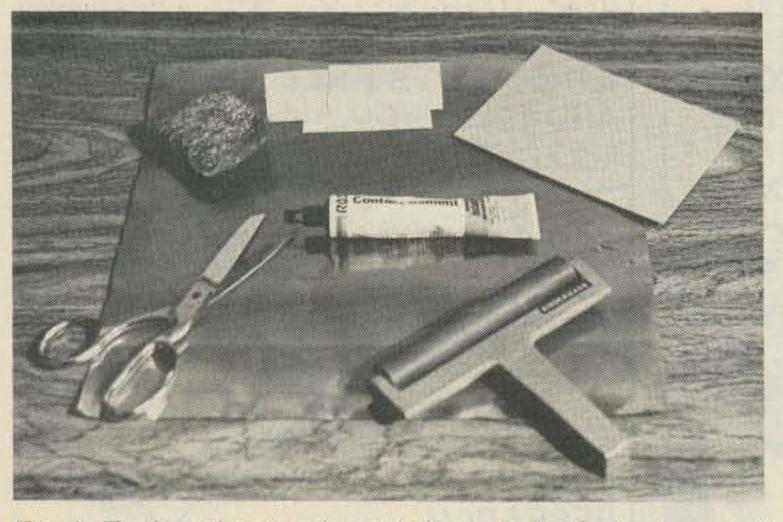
Tools and materials needed are a pair of scissors, a steel wool soap pad, small pieces of cardboard cut from a filing card, contact cement, a sheet of copper and a phenolic board. The photographic roller is optional.
